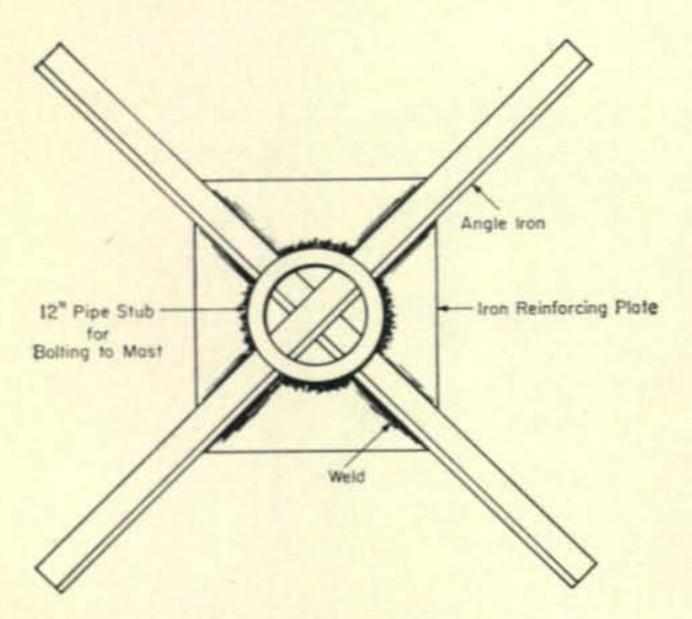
Diagram of the basic element mounting cross. Material specifications are given in the text. The entire assembly should be painted, after welding, to prevent corrosion.
